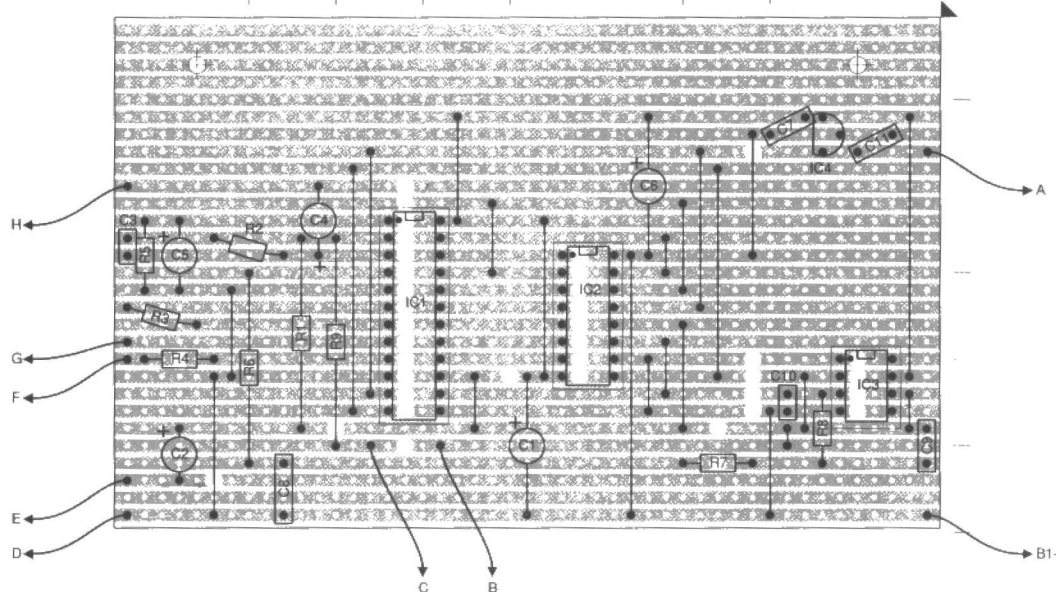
the component layout on a stripboard panel of 47 holes x 29 strips
